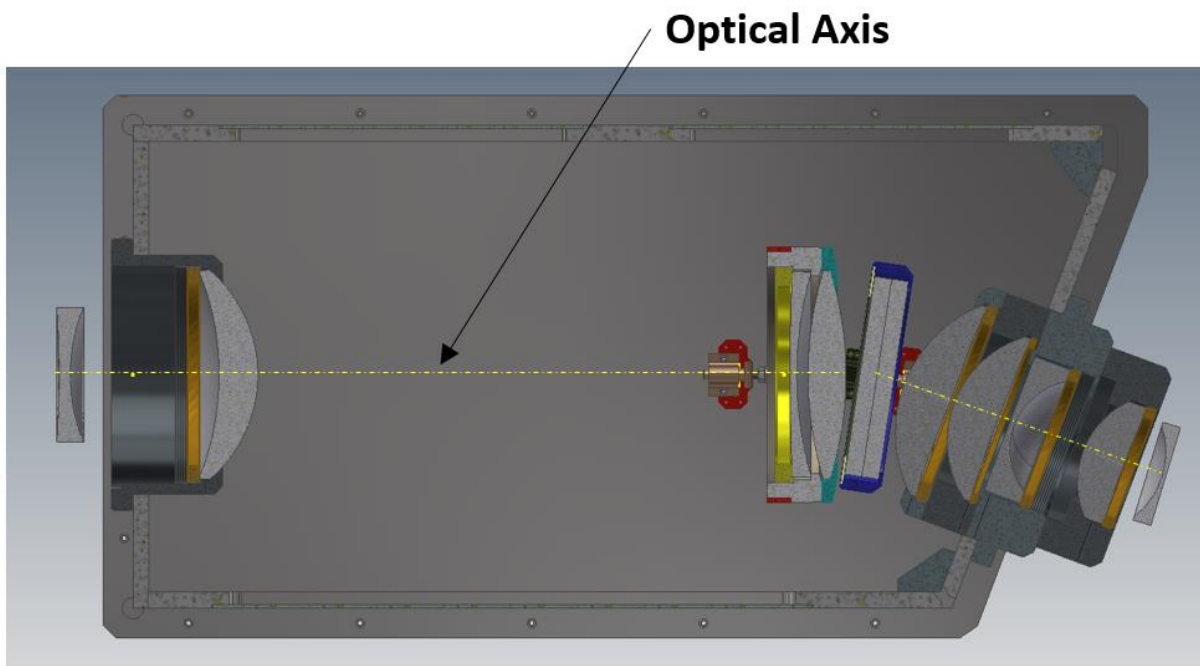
Cross-section from above showing the spectrograph assembly with position of all optical elements and mounting cells.
